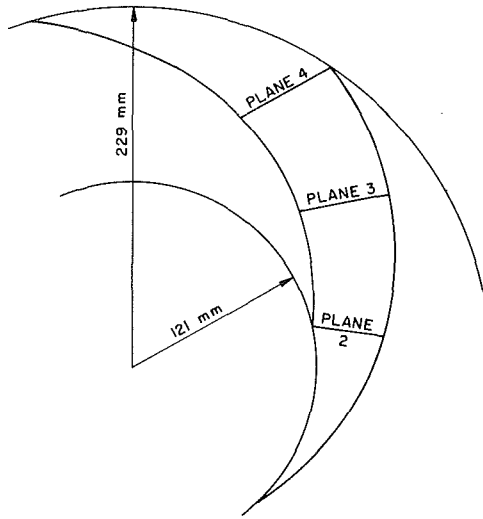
Dimensions of the Kittmer radial impeller—showing measurement planes 2, 3 and 4
